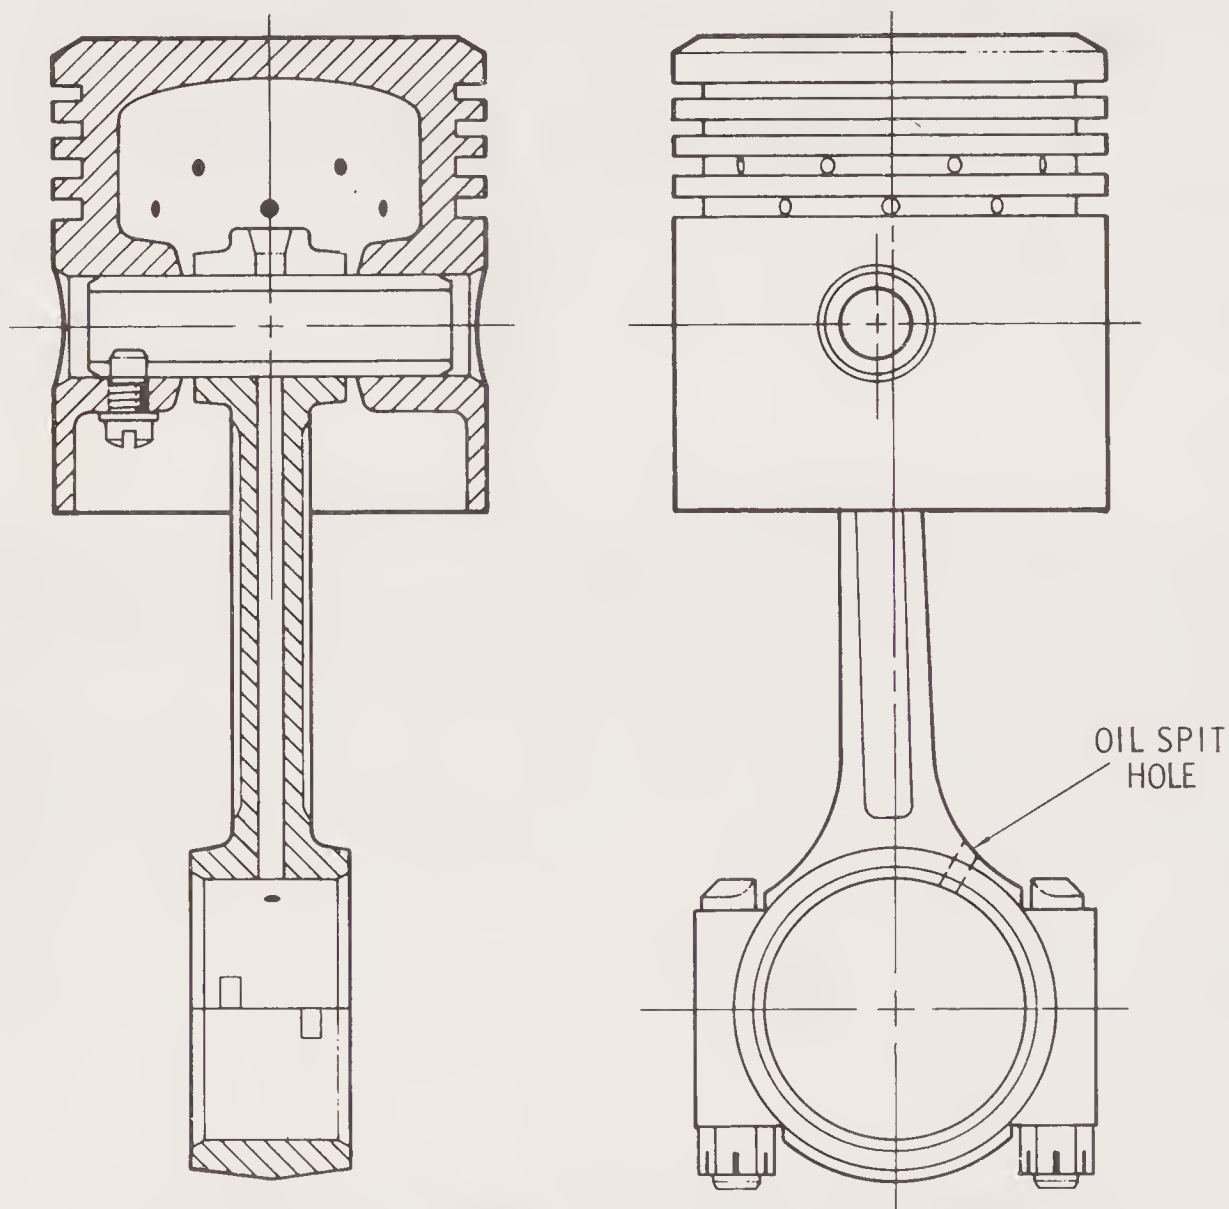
Typical rod and piston assembly. When installing connecting rods, oil spit hole in connecting rod bearing usually is toward the no-valve side of the engine.
